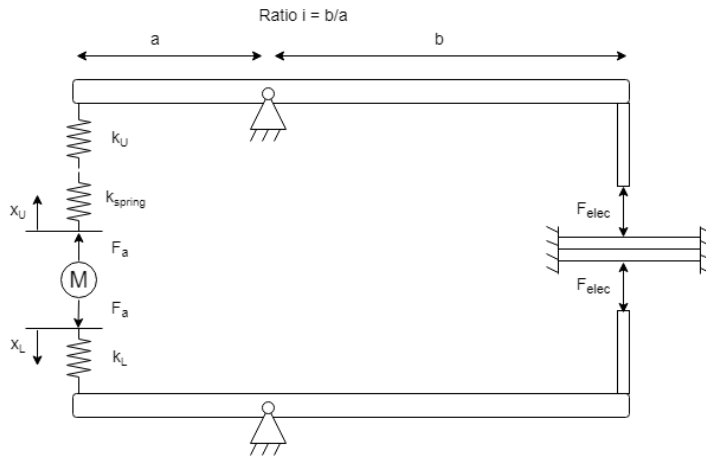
Schematic model X-type welding gun. k_U and k_L represent the upper and lower arm bending stiffness, k_{spring} the suspension stiffness. Both arms are pushed against the rigidly supported sheets with a certain electrode force F_{elec} .
